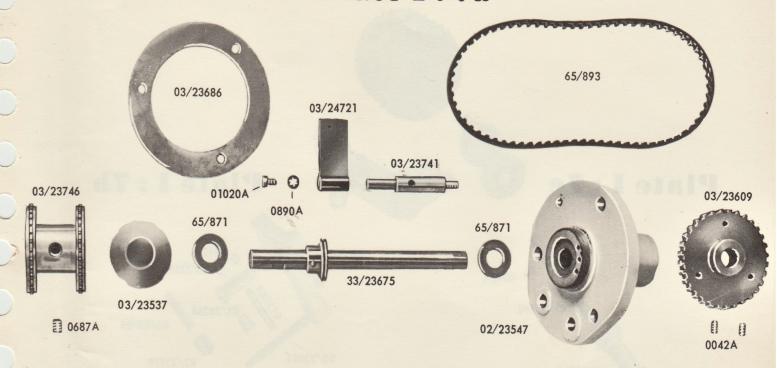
TOP SPROCKET BEARING ASSEMBLY
